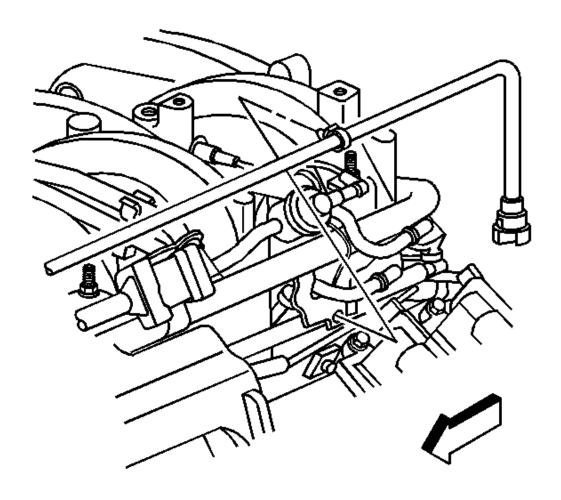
View Of EVAP Tube At Fuel Rail Courtesy of GENERAL MOTORS CORP.
